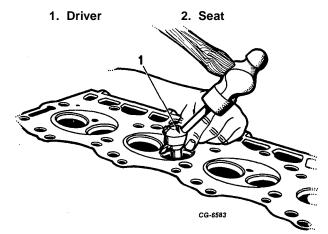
Staking Valve Seat Insert in Cylinder Head with Peening Tool
